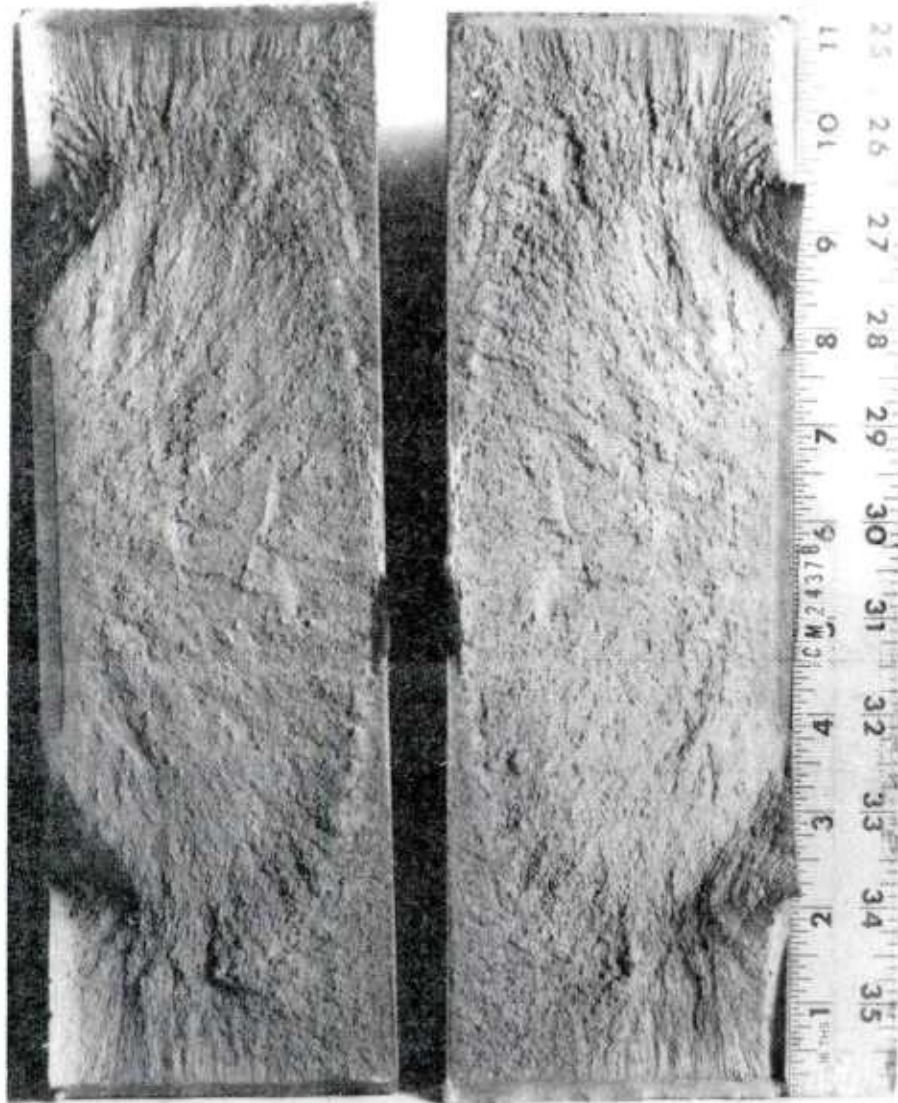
Fracture surface, semi-elliptical crack. The photo shows the 4-inch notch, $1/4$ inch deep in 175mm cylinder CM2437B and shows the semi-elliptical crack shape developed by fatigue to $N = 3,430$ cycles and failure through the 3.575 inch thick wall.
